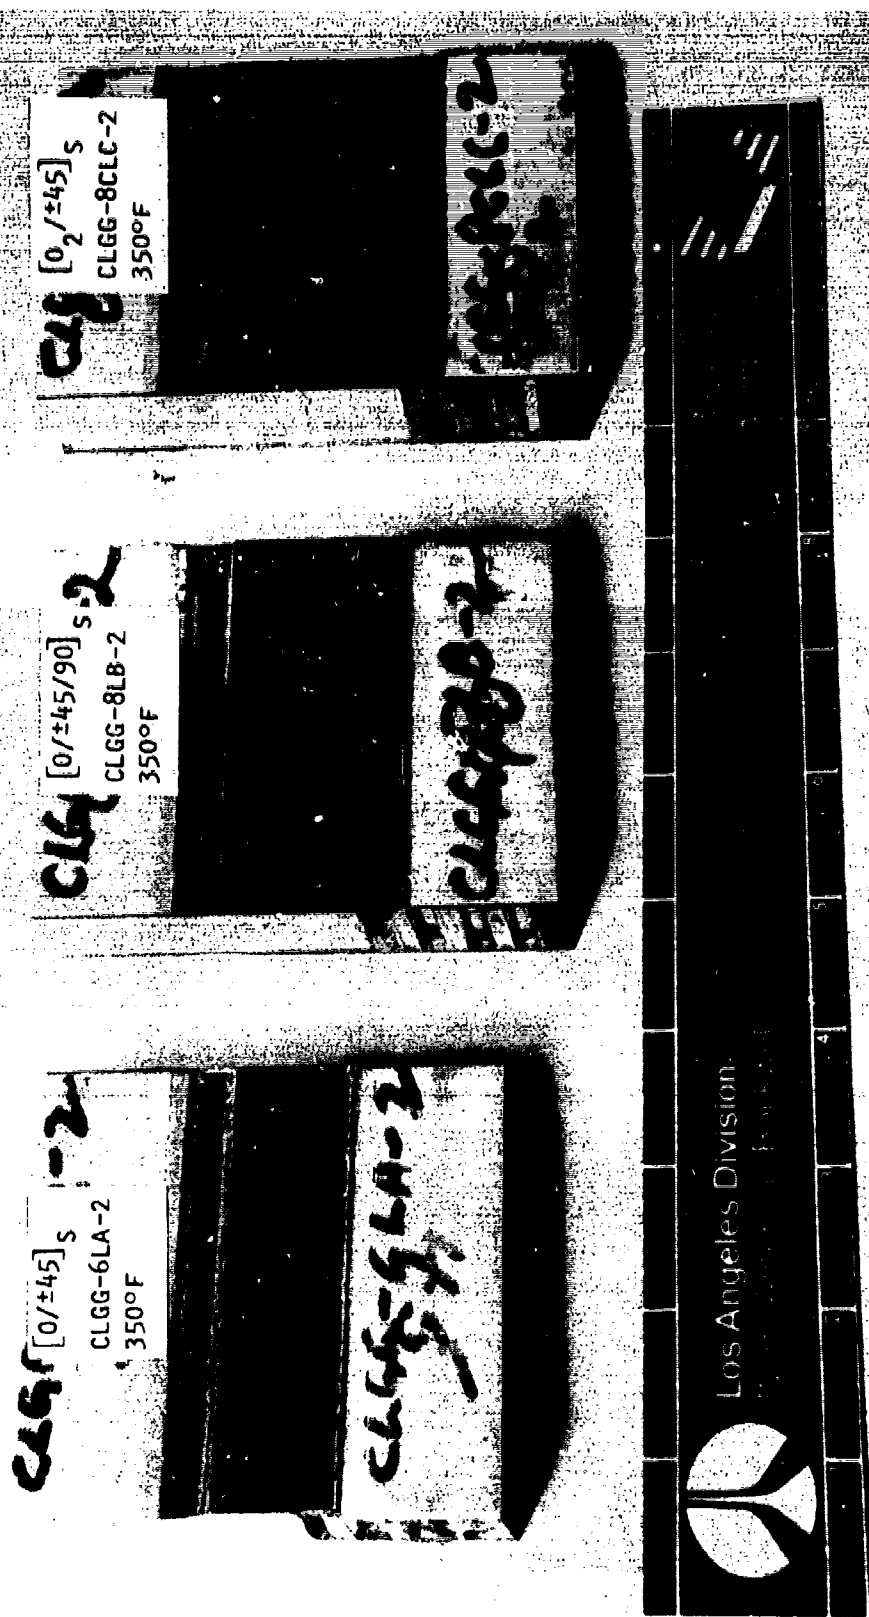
Failed 350°F Adhesive-Bonded Lap Joint Compression Test Specimens - Graphite/Epoxy Adherends (Type AS/3002 - Batch), Metlbond 329-7 Adhesive
